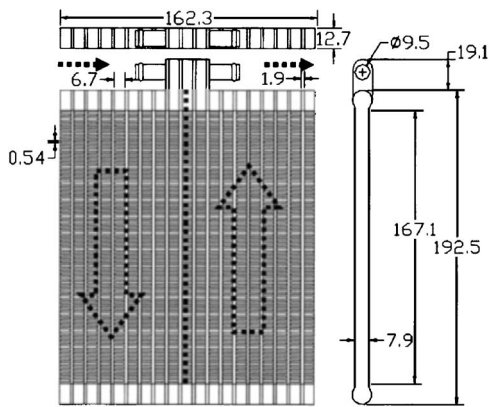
Schematic of the heat exchanger (dimensions in millimeters).
